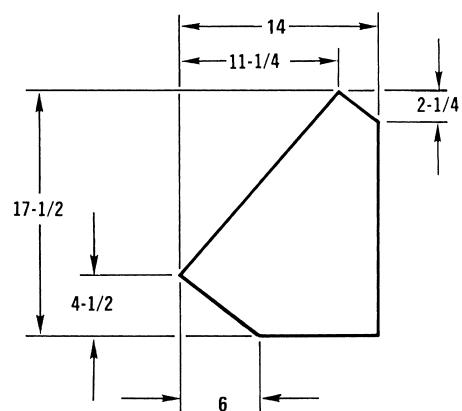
Horizontal Stabilizer Single Shipping Container (Sheet 2)
